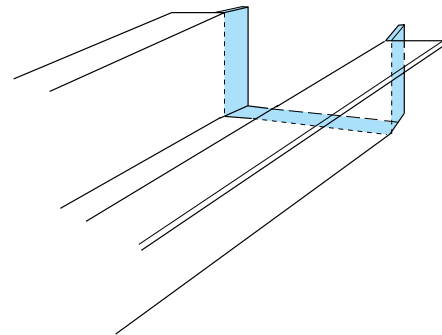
Step Tabs Inward on the New Rail Section
